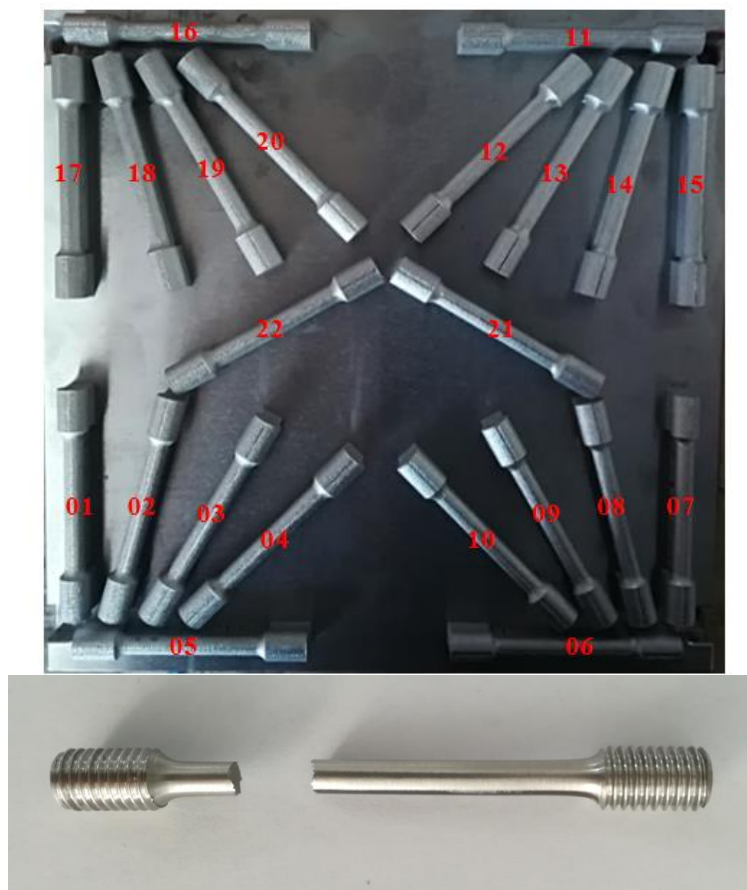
The cylindrical rods on the table, used for manufacturing of the test samples, and the test sample after the test
